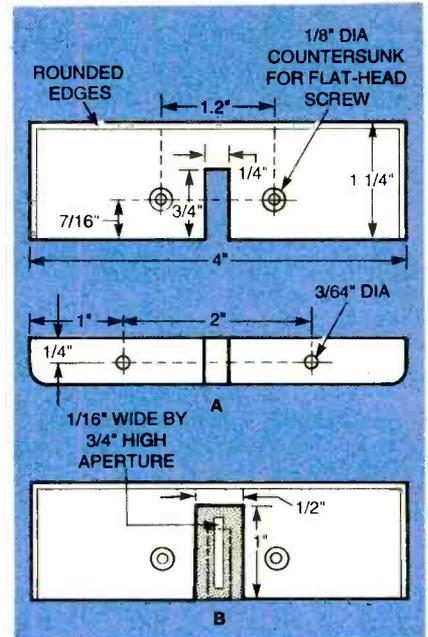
The card guides need a slot in one of them to mount the sensor. Use flat-head screws to mount the sensor so that the guide slot will be smooth.
